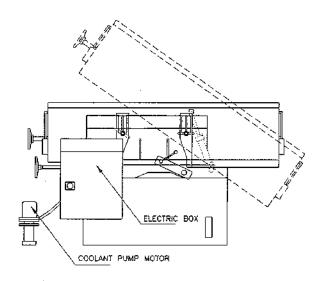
FRONT VIEW OF ELECTRIC COMPONENT LAYOUT
